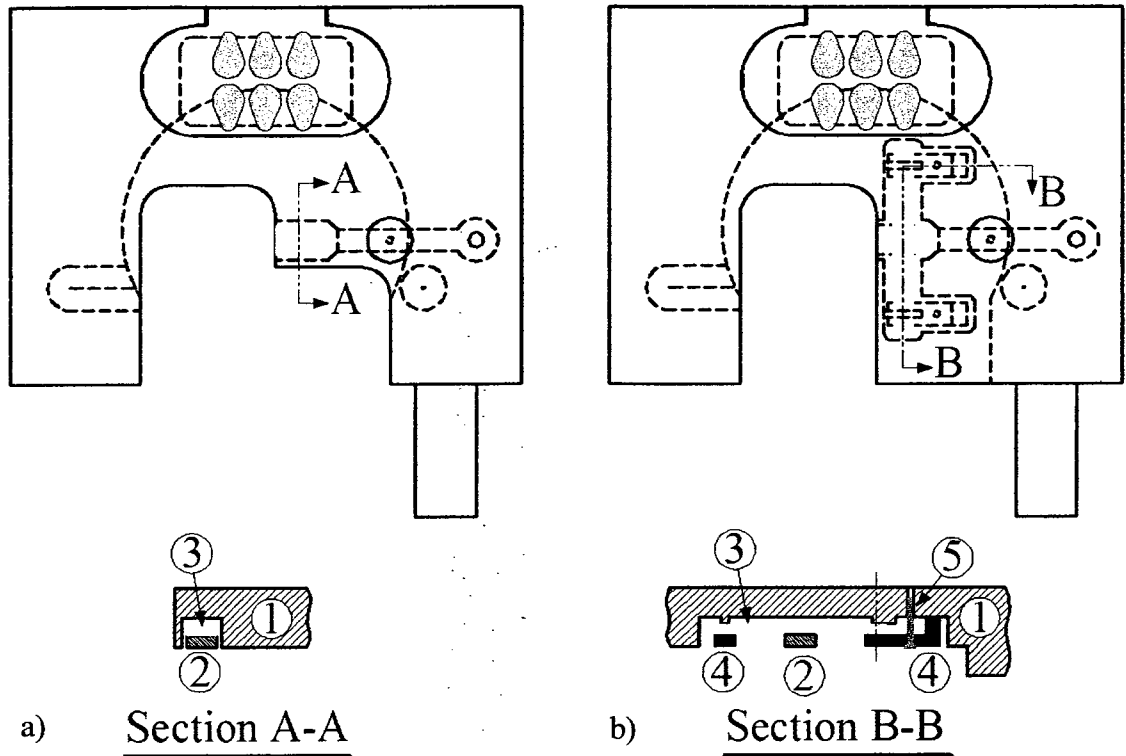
Two common mechanisms for supporting the piezo; a) gluing and b) clamping. In this picture, (1) is the stainless steel body of the tip holder, (2) is the cantilever seat, (3) is the piezo element, (4) are the clamps and (5) is the clamp's screw.
